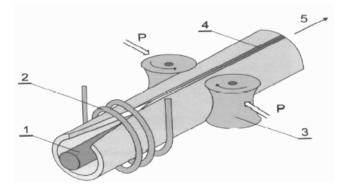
Pipes welding process [7]; 1 – impulse generator and ring inductor of high frequency currents, 2 – magnetic resistor, 3 – pressure rolls, 4 – weld, 5 – welding direction, P – pressing forces
